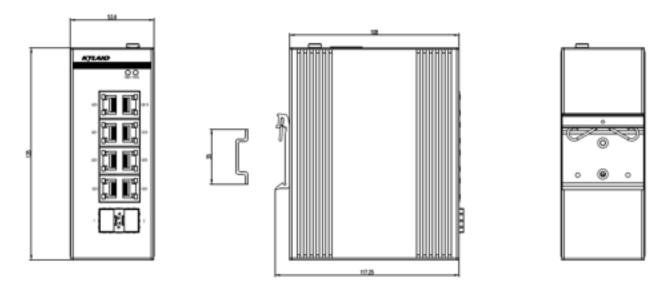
Opal10GL Dimensions for DIN-Rail Mounting (unit: mm)
